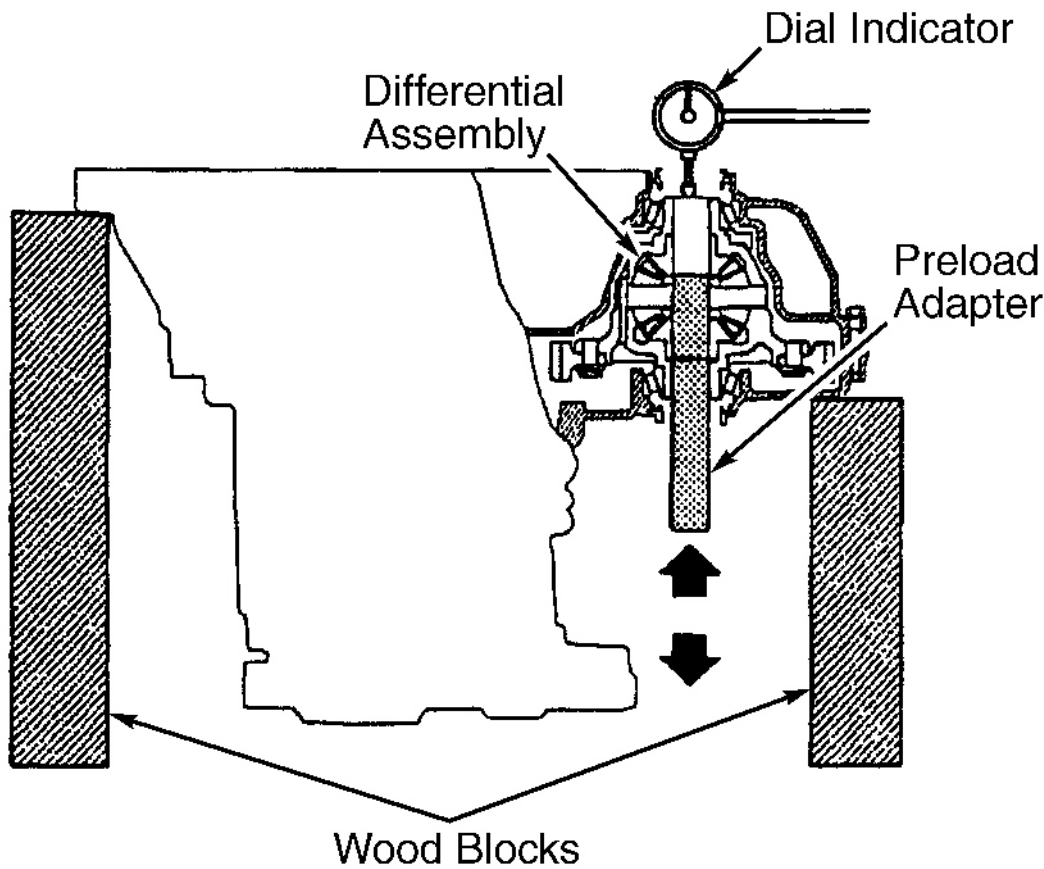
Measuring Side Gear-To-Viscous Coupling Clearance
